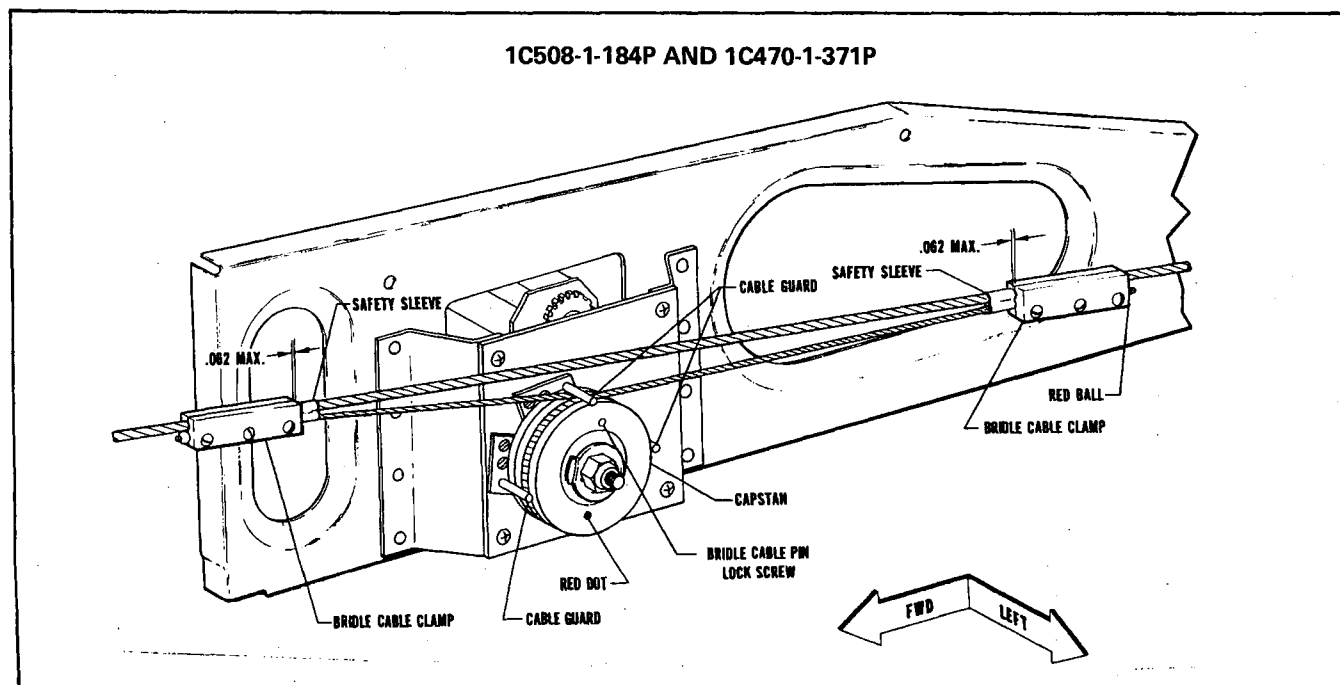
Pitch Servo Installation, PA-23-250 (Six Place)
